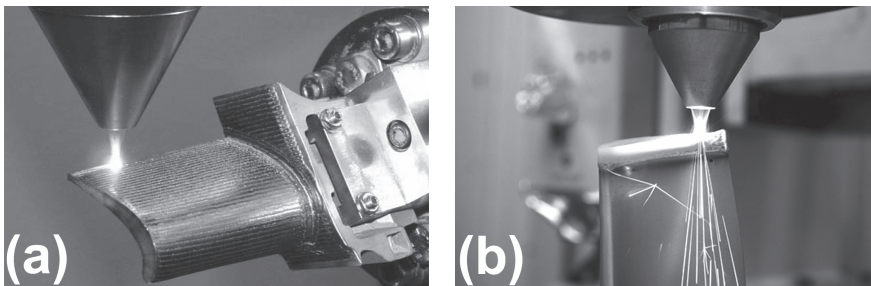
(a) Coating, and (b) repair of turbine blades using laser cladding<sup>8,9</sup>.
